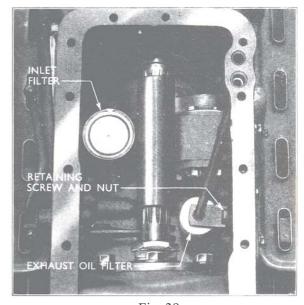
Location of Exhaust Oil Filter Assembly
